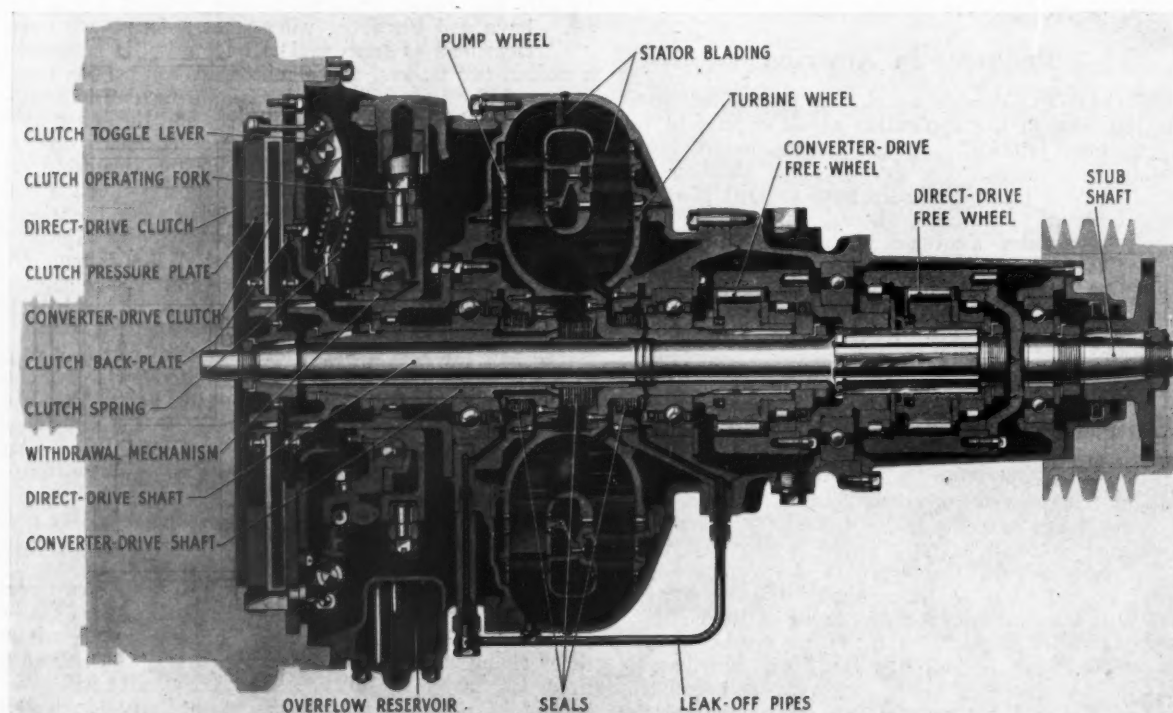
Section through Leyland transmission, showing double friction clutch, hydraulic converter, and two free-wheels
